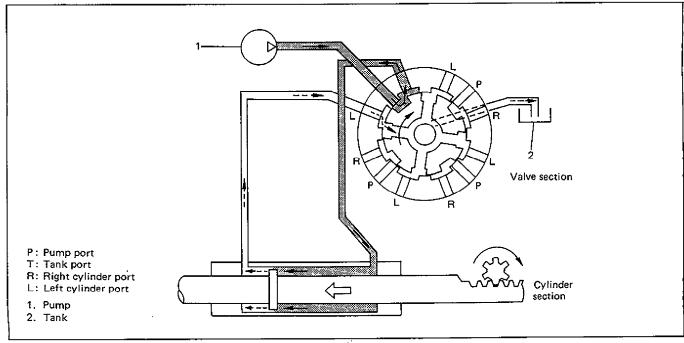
B1-5 Operation When Steering Wheel Turned to the Right
